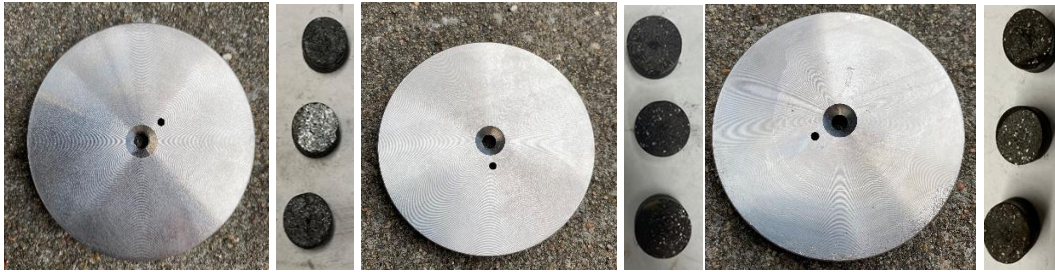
3D printed SS316 rotor and laboratory-formulated NAO pad samples.
